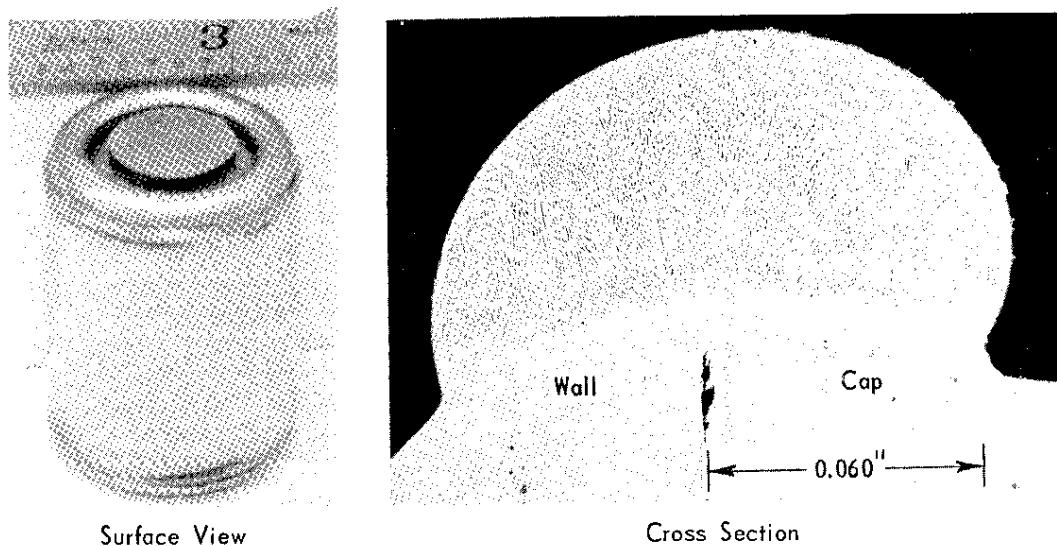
TYPICAL WELD CLOSURE ON "INCONEL" 600 CAPSULE
